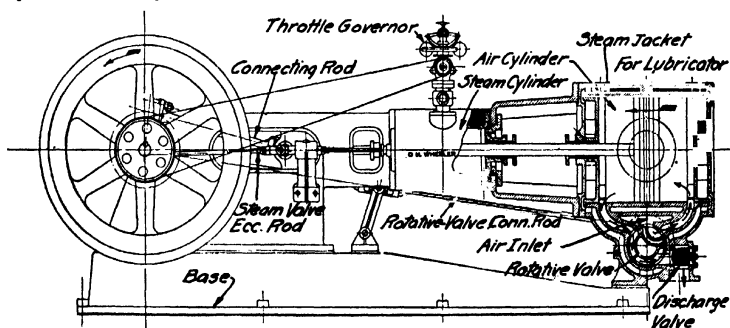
Wheeler Rotative Steam-driven Dry Vacuum Pump.
